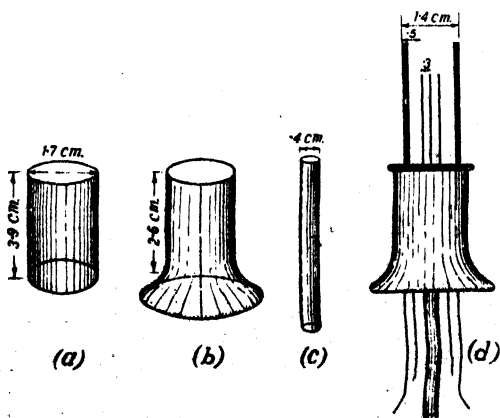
STRUCTURAL PARTS OF TYPE 80 FULL-WAVE RECTIFIER — (a) Glass piece for flare; (b) glass flare; (c) exhaust tube; (d) glass flare stem with lead-in-wires sealed.
